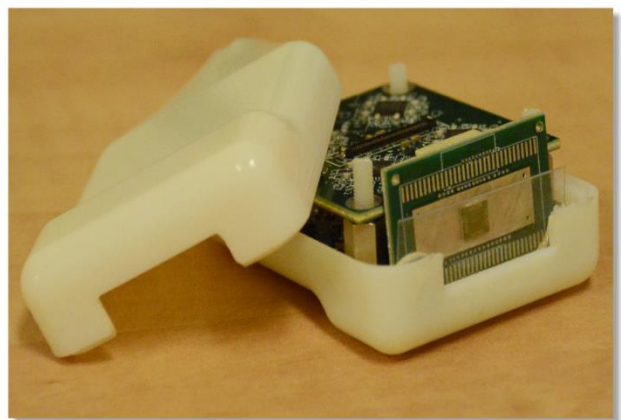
8 layer PCB design of readout module with the CMUT array carrier board.
